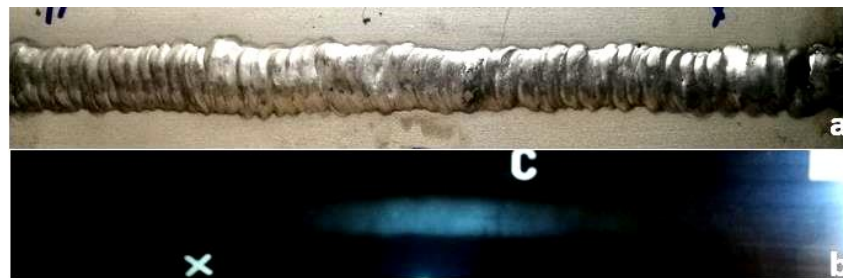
Photographs shows (a) general appearance and (b) X-Ray Radiography of joints welded by GTAW technique using 140 A and 19 V.
